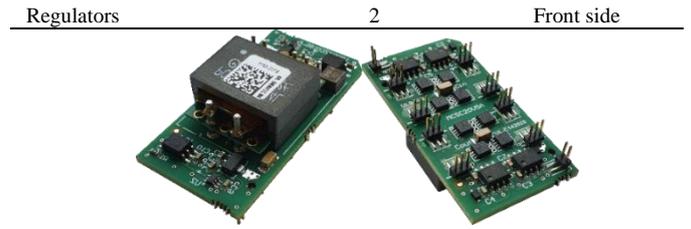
G2Elab DC/DC DAB converter, on the left the front side, on the right of the backside.
